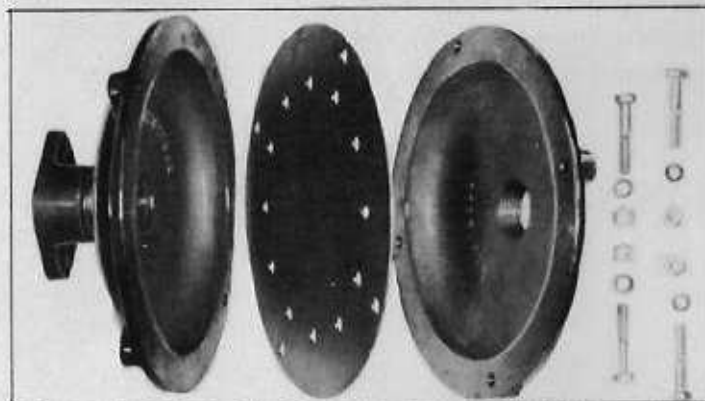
EXHAUST MUFFLER DISASSEMBLED
